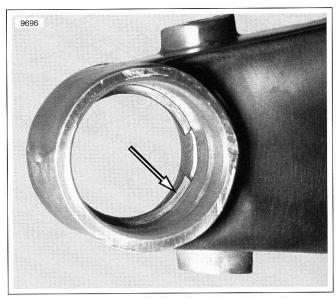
C-clip Bearing Race Separator in Left Pivot Bore
